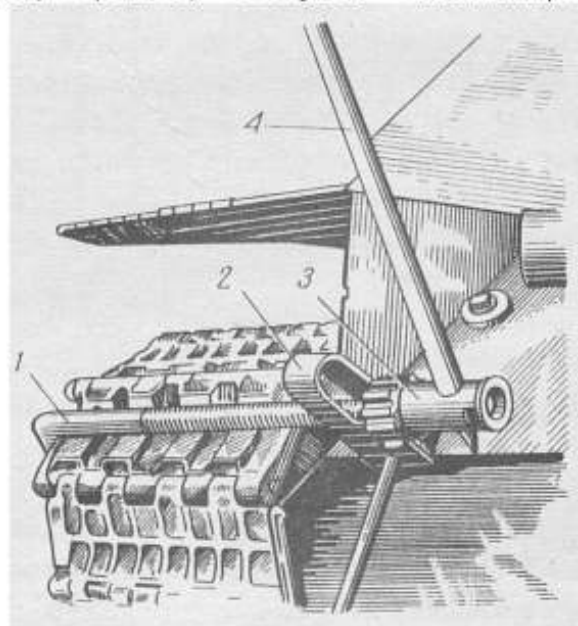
ENGAGING THE CRANK OF TRACK ADJUSTING MECHANISM BY MEANS OF FIXTURE 12-00
